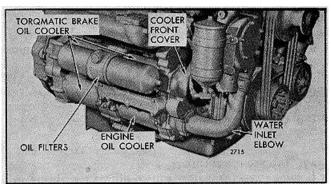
Dual Tube-Type Oil Cooler Mounting
